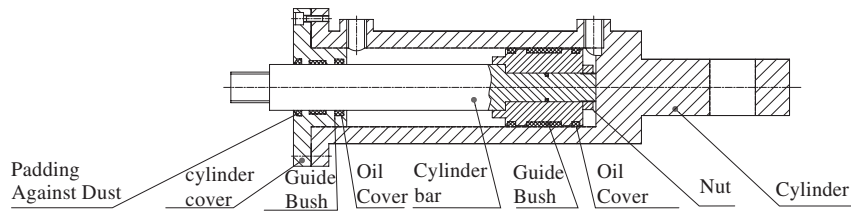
Structure diagram of guide disc's hydraulic clamping mechanism on oil cylinde
